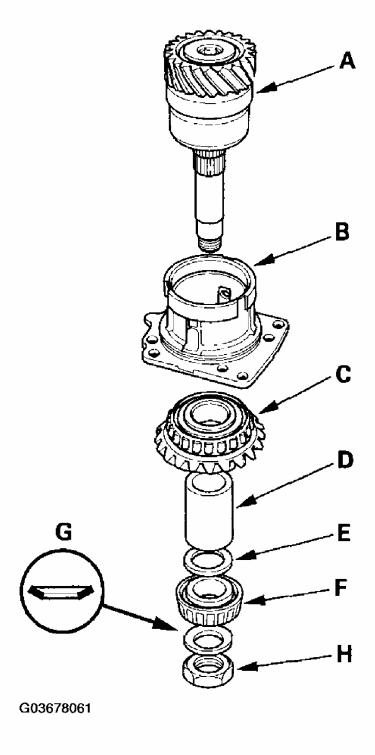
Installing Transfer Shaft Assembly In Transfer Holder Courtesy of AMERICAN HONDA MOTOR CO., INC.
